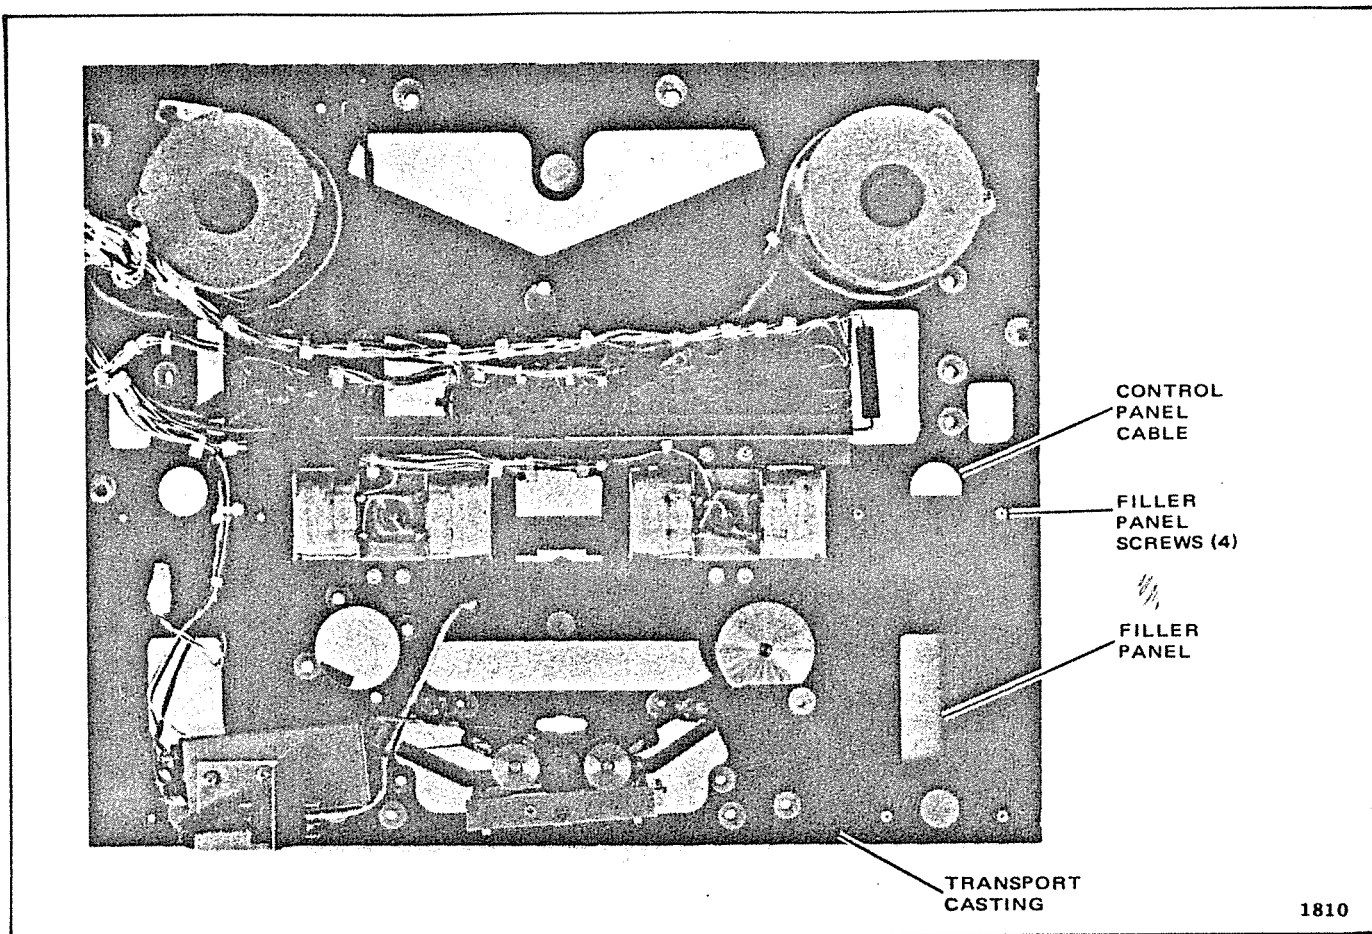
Rear View of Filler Panel (Transport Components Removed for Clarity)
